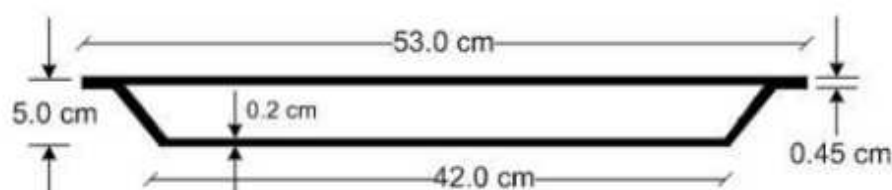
Scheme of the couchtop dimensions (frontal view) [16].
